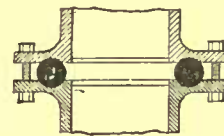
The Plain Non-Adjustable Flange-Joint.
